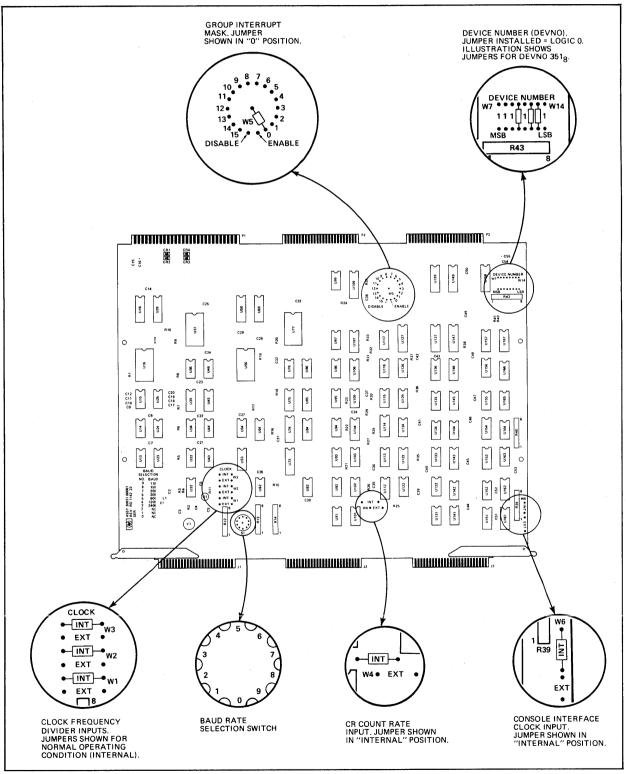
System Clock/Console Interface PCA Jumper and Switch Locations
